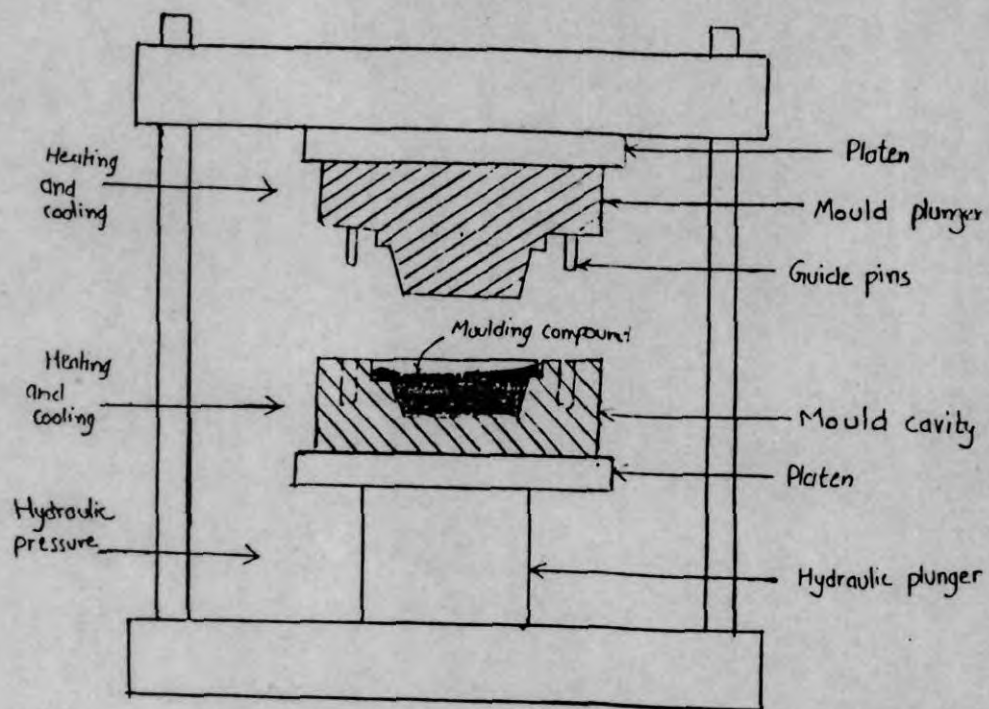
COMPRESSION MOULDING PRESS & MOULD
